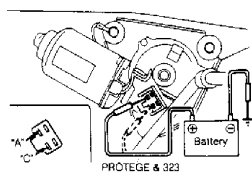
Identifying Wiper Motor Terminal (Protege, 323 & 1992 929)
